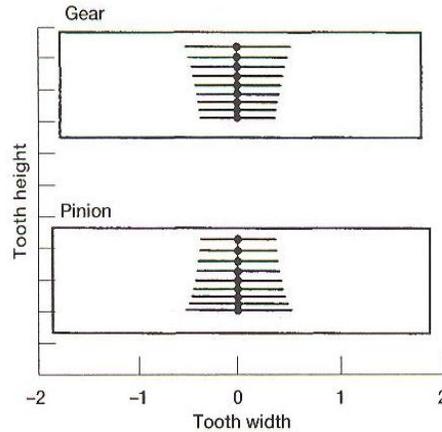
Path of contact and bearing contact of aligned gear drive with modified geometry
